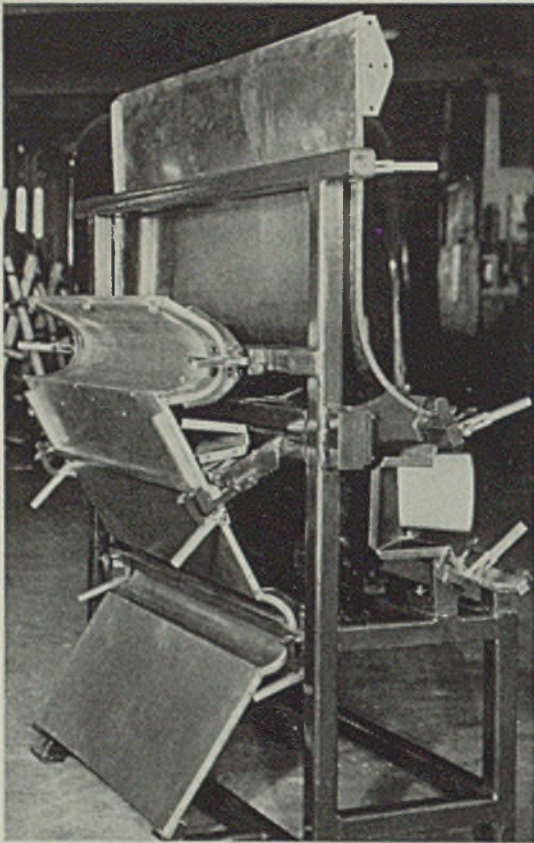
Cylinder and top subassemblies, previously assembled on conventional stationary spot welders, are put together in this fixture using a "pinch" type spot welding gun
